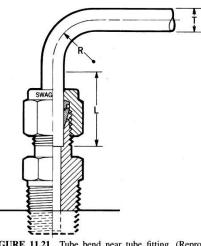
Tube bend near tube fitting. (Reproduced with permission of Swagelok Marketing Co.)
